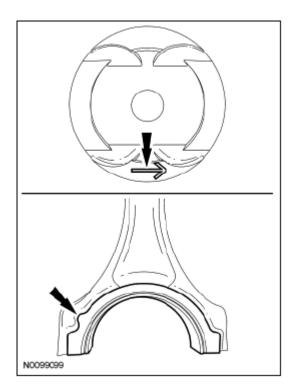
Identifying Piston And Connecting Rod Installation Position Courtesy of FORD MOTOR CO.
